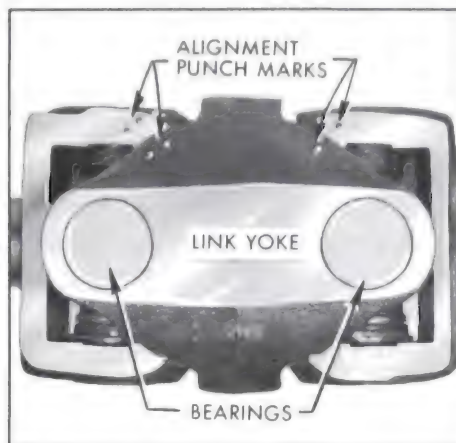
Link Yoke Showing Alignment Punch Marks
